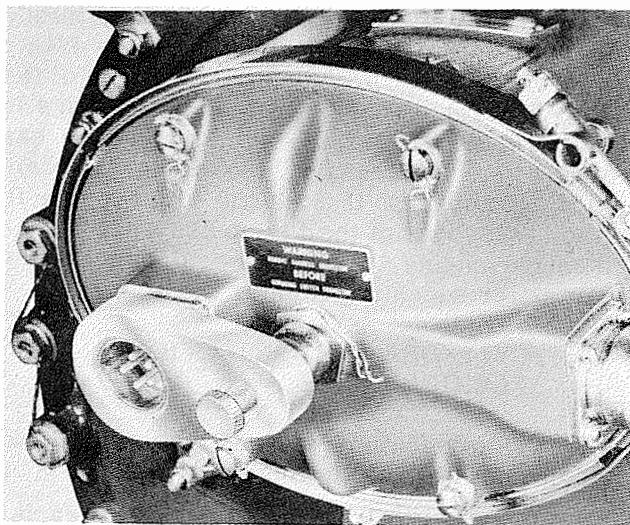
Magneto with Plunger Locking Clamp Installed
